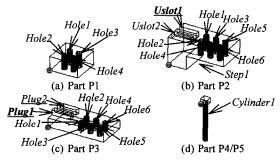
The parts of the sample assembly: the symbol '•' indicates the RO of each part
